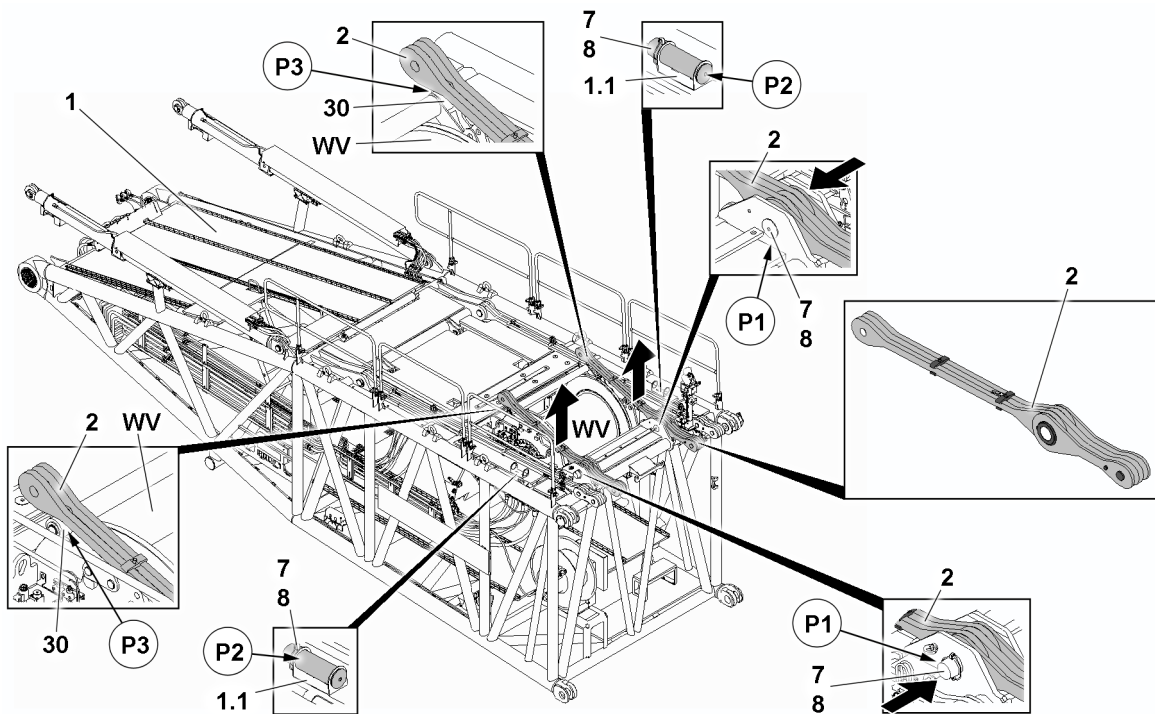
Disassembling the H-guy rods 2 on the H-pivot section 1
